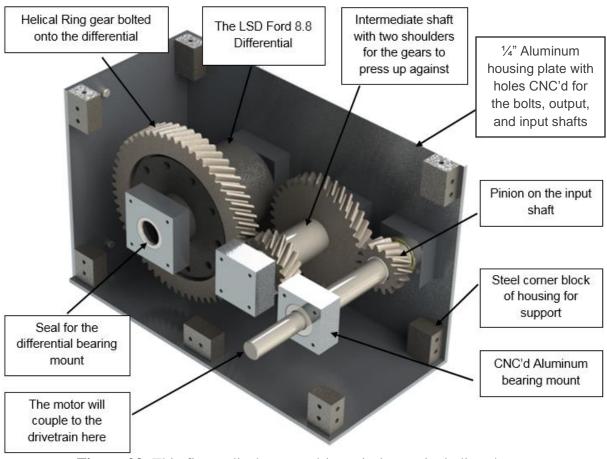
This figure displays our drivetrain layout including the four helical gears and the input shaft protruding from the housing.
